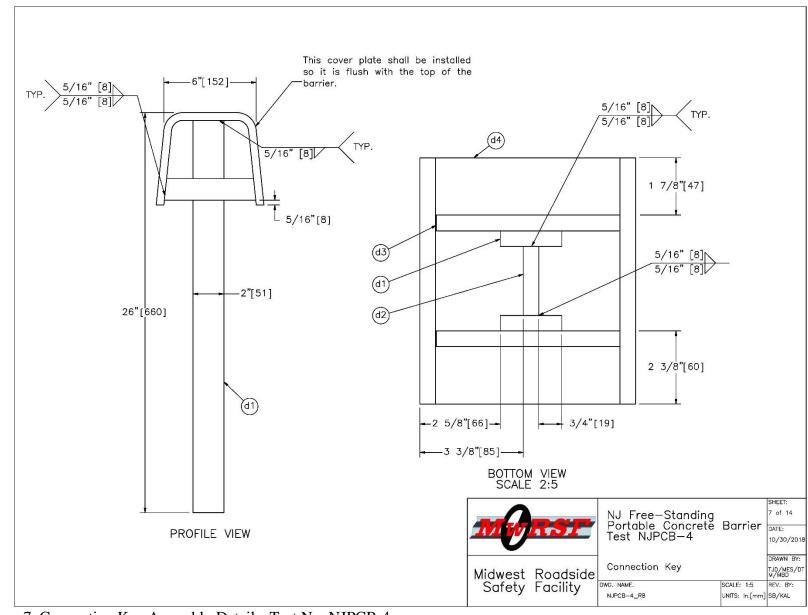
Connection Key Assembly Details, Test No. NJPCB-4
